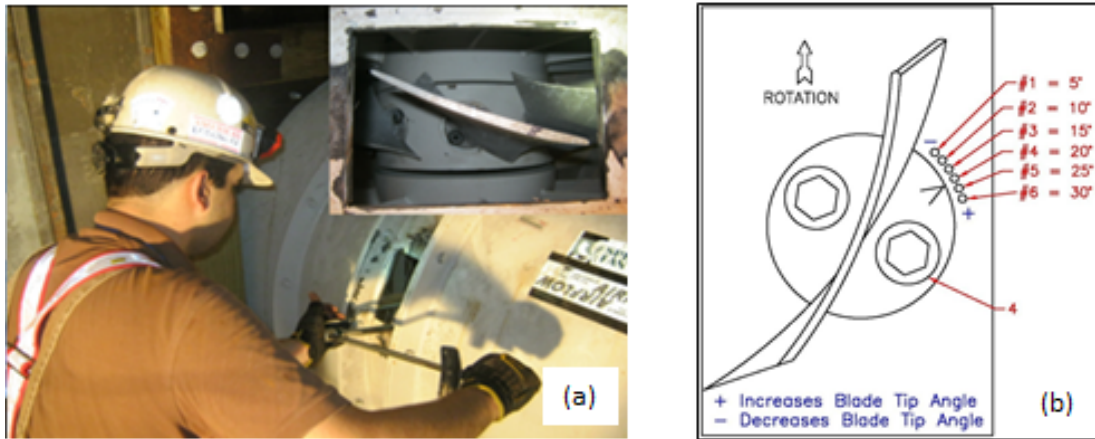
Axial fan equipped with adjustable pitch blades: (a) Changing blade setting. (b) Diagram showing possible blade settings.
